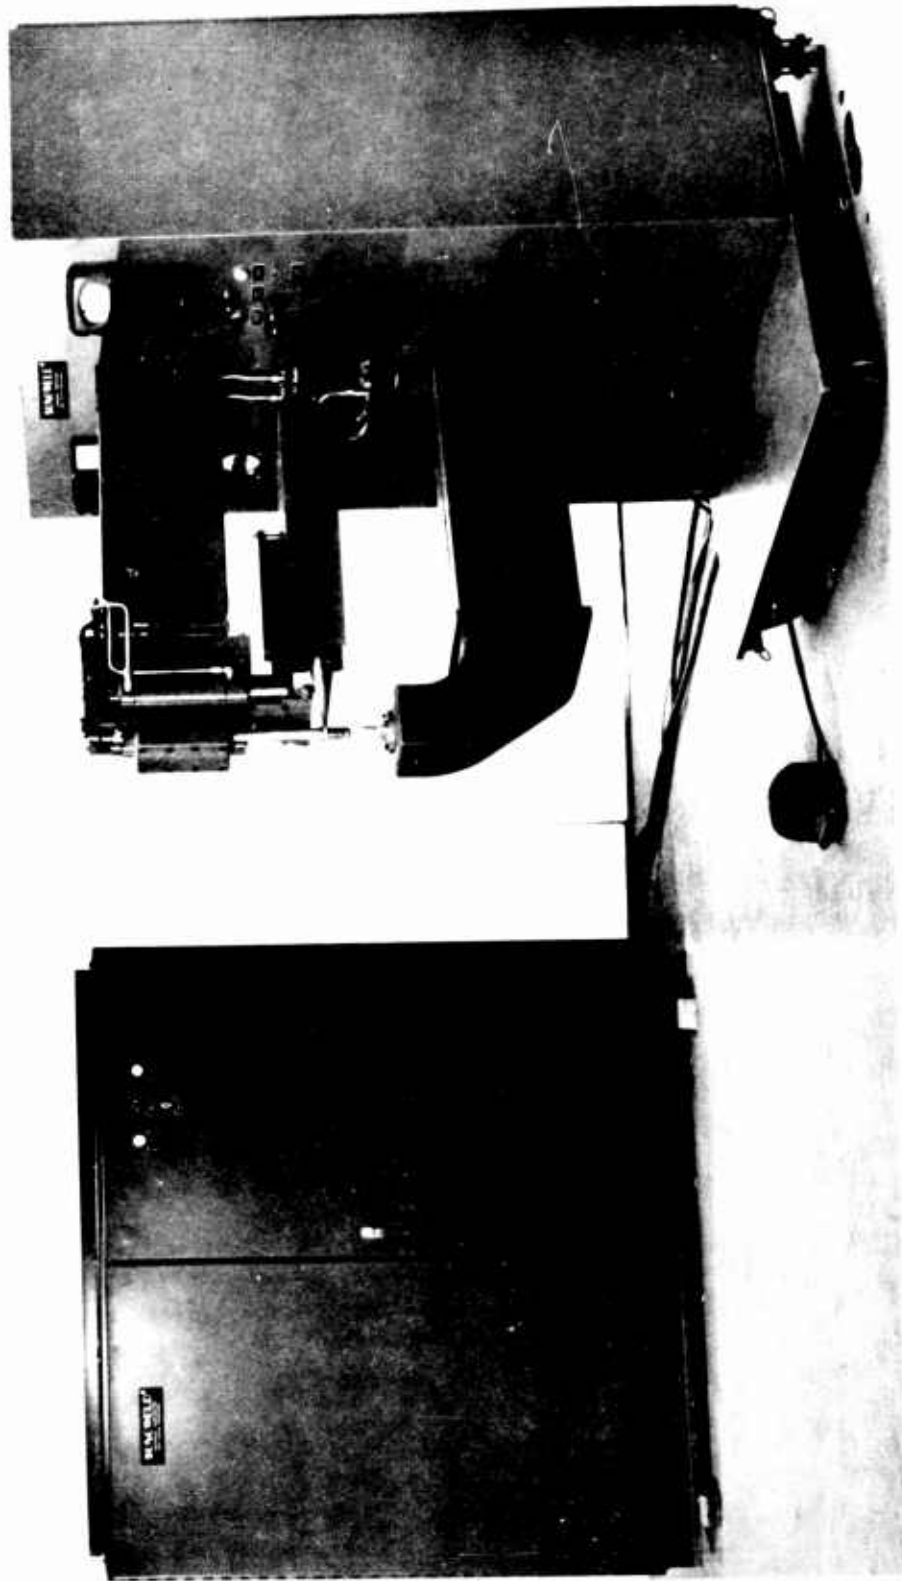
Typical 4000-watt ultrasonic spot-type welding machine.
